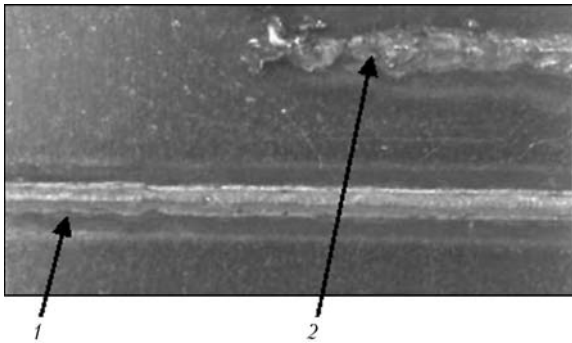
Bead deposition on steel sheet 1.2 mm thick with pulsed 1 and regular 2 electrode wire feed
